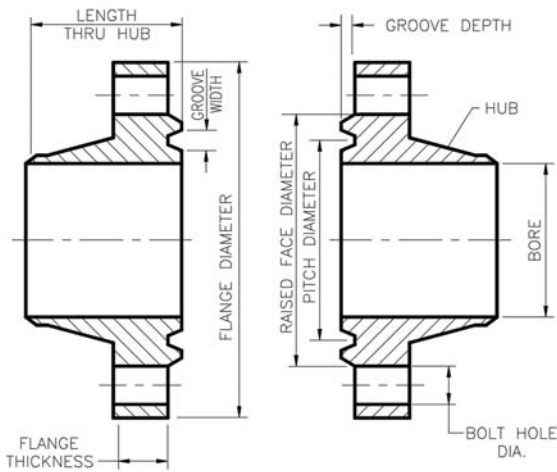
Sectional view of ring-type joint welding neck flange.
